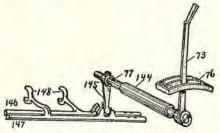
View showing how the gear-shifting lever and the selector connect with the shifting bars. The lever is now in "neutral" position, but if pushed to the inside gate or selector, it would shift the inside bar (146): if pushed to the outside gate position it would shift the outside bars (147). Note, that the lever moves sidewise as well as forward and backward.
